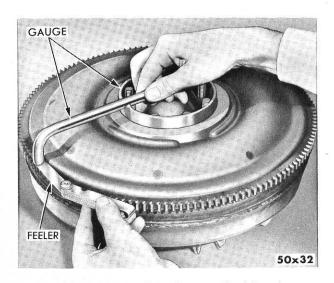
Positioning Ring Gear on Fluid Coupling (Tool C-896)
